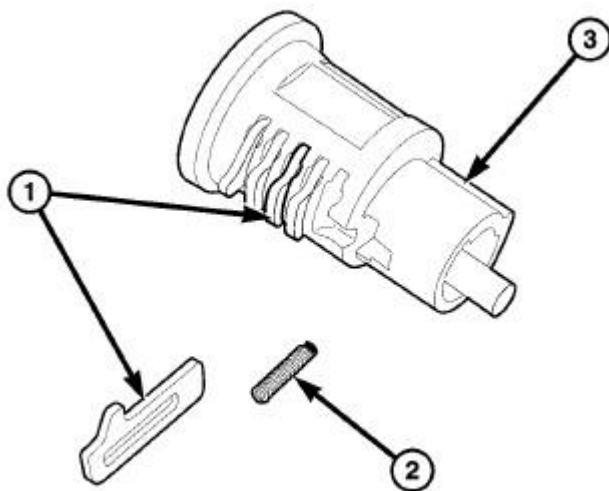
Removing/Installing Tumblers-Glove Box Lock
